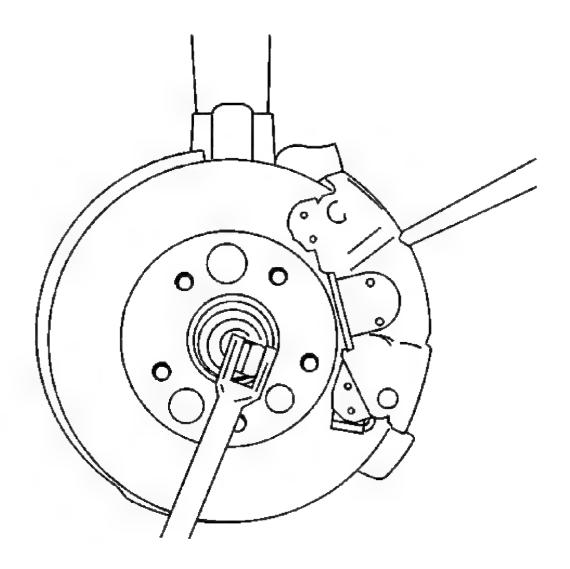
Using Drift To Prevent Rotor Rotation Courtesy of GENERAL MOTORS CORP.
